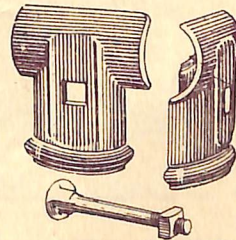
Illustration of "Cyclone" Split Clip, showing the various pieces before assembling.
